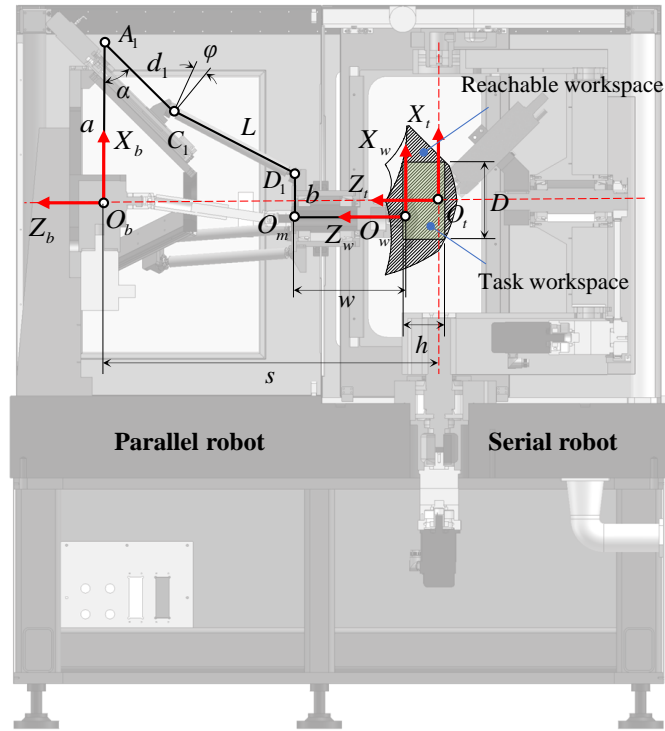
Geometric parameters and cross-sectional view of the workspace of the hybrid robot.
